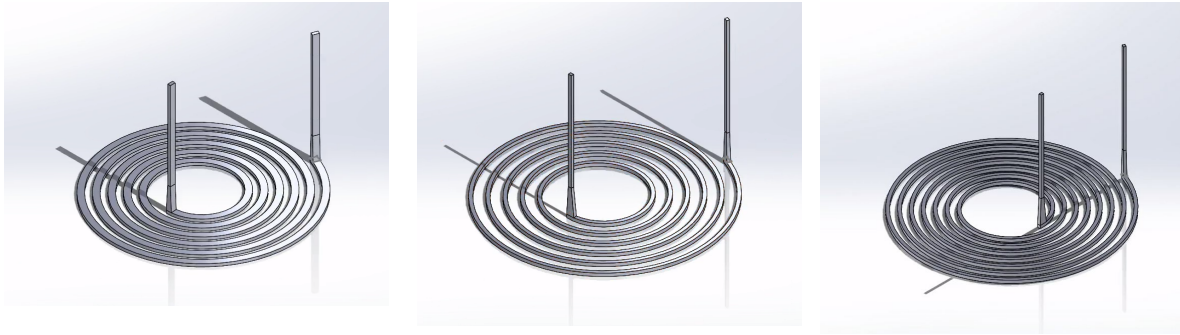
Left: Drawing of Inconel coil design A with resistance 1.86 Ω . Center: Drawing of Inconel coil design B with resistance 3.72 Ω . Right: Drawing of Inconel coil design C with resistance 4.90 Ω .
